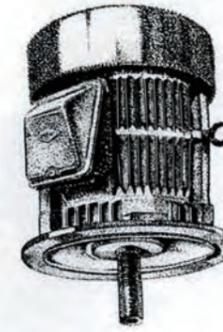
Frame Nos 90L ~ 132M (Typical Drawing for Flange Type)
